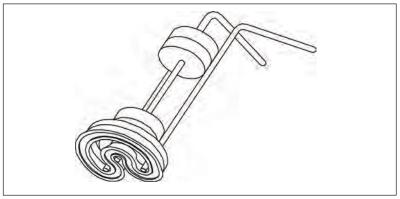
Three-leg installation tool for polyurethane and rubber seals
